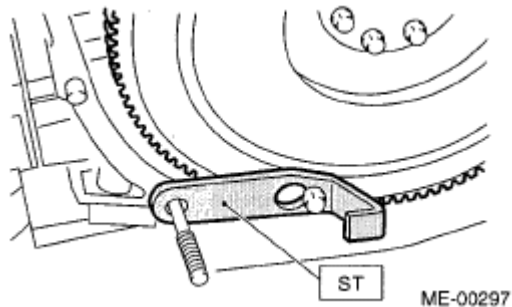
Locking Crankshaft Using Crankshaft Stopper ST498497100 - MT Model
